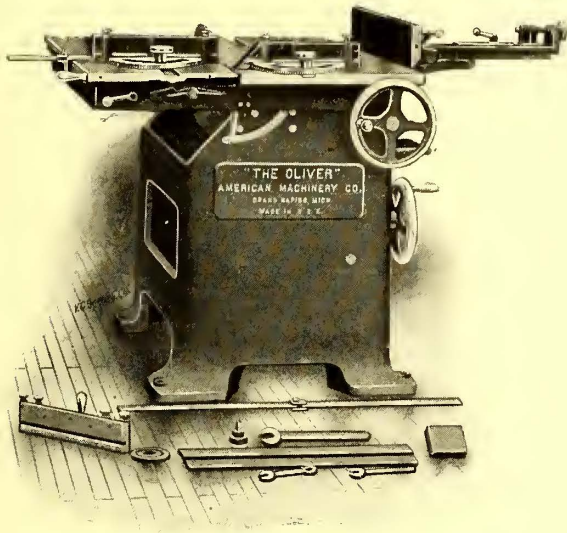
COMPLETE UNIVERSAL SAW BENCH
